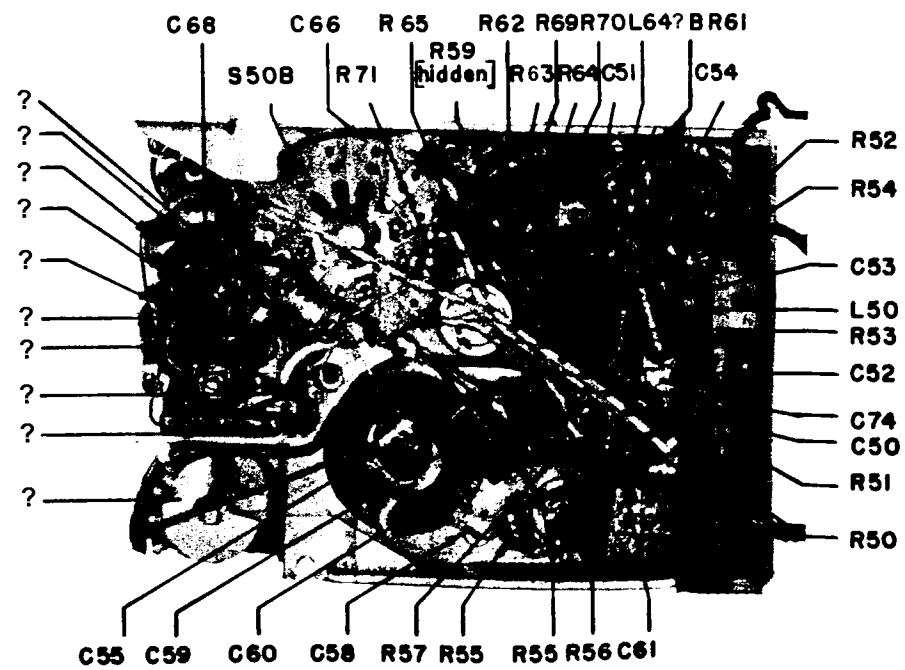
MASTER OSCILLATOR Assemblies WS Cdn No. 29 (BOTTOM VIEW)
